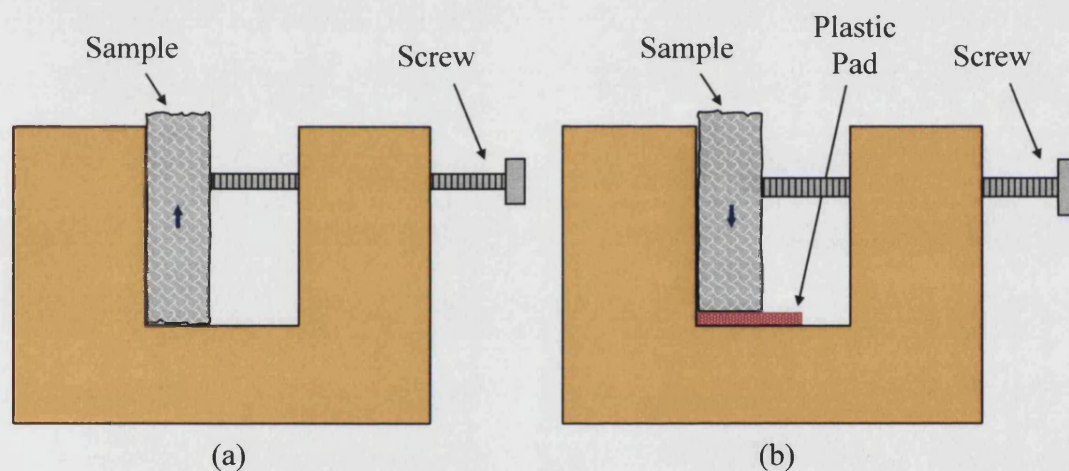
A device for grinding samples for compressive testing (a) the sample is fastened in the gap by a screw and the top surface is ready to be ground (b) reversing the samples and inserting plastic pads under the sample allowed the opposite surface to be ground.
